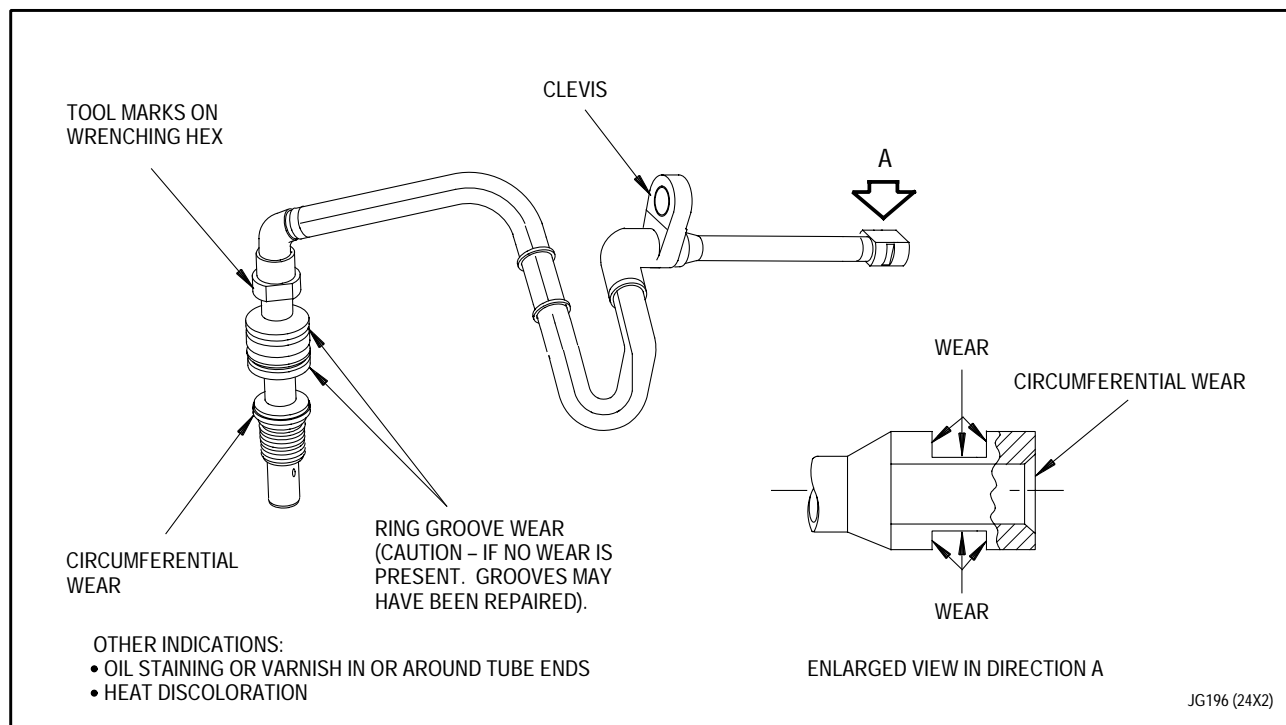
Methods to Determine If No. 4 Bearing Internal Pressure Tube Assembly Is New or Has Been Used/Repaired
